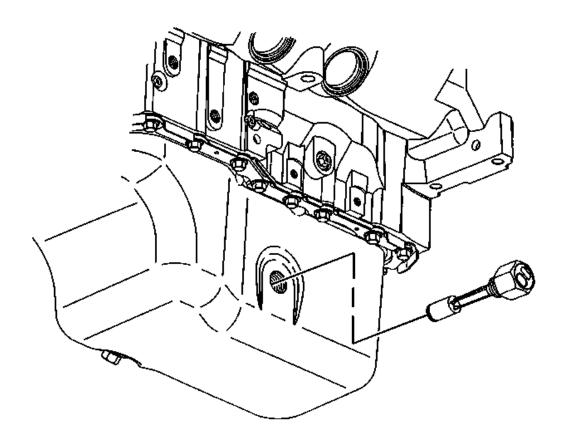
Oil Level Sensor Courtesy of GENERAL MOTORS CORP.
